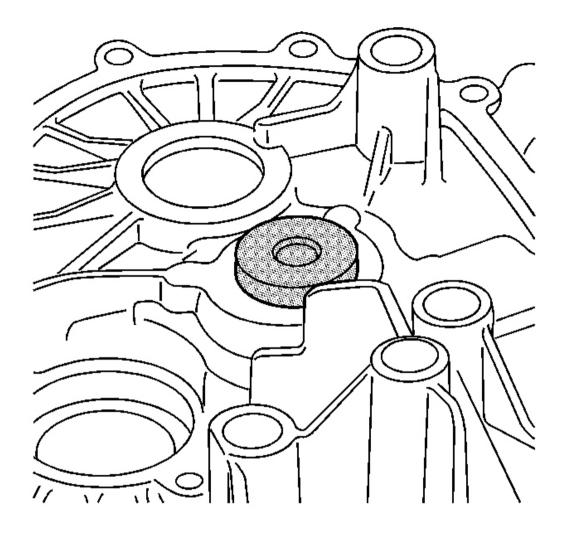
Locating Input Shaft Bearing Courtesy of GENERAL MOTORS CORP.
